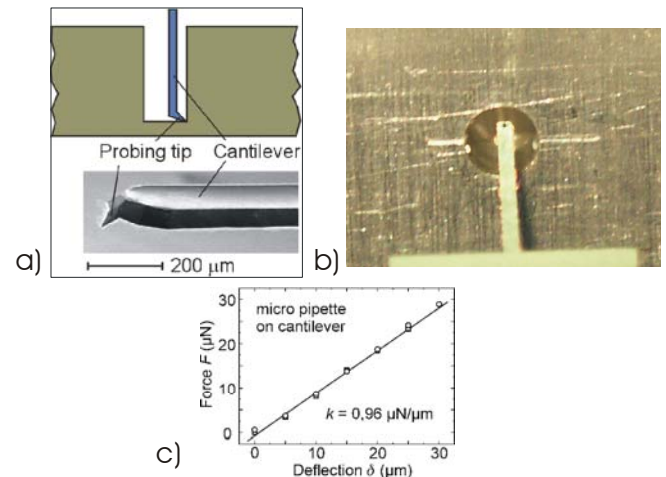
a) Schematic of measuring a blind hole with a protruding tip; b) drilling hole measurement; c) stiffness calibration of a glass pipette on a cantilever.
